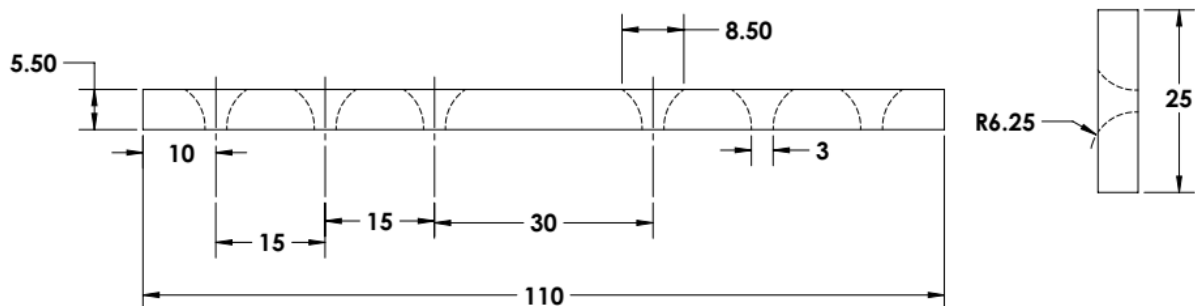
Geometry of composite fixation plate (All dimensions in mm).
